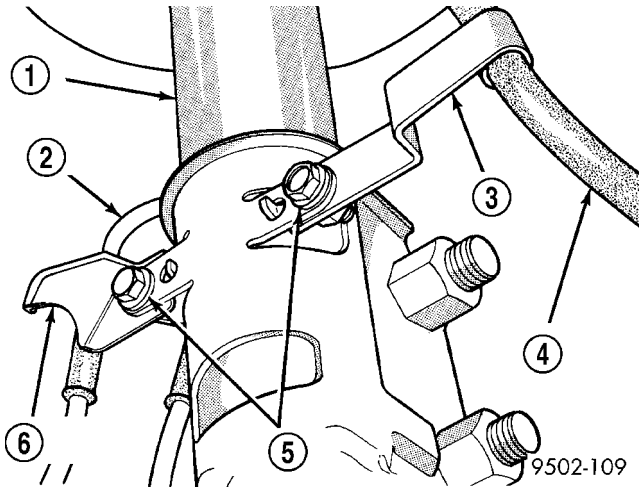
Brake Hose And Speed Sensor Cable Routing
